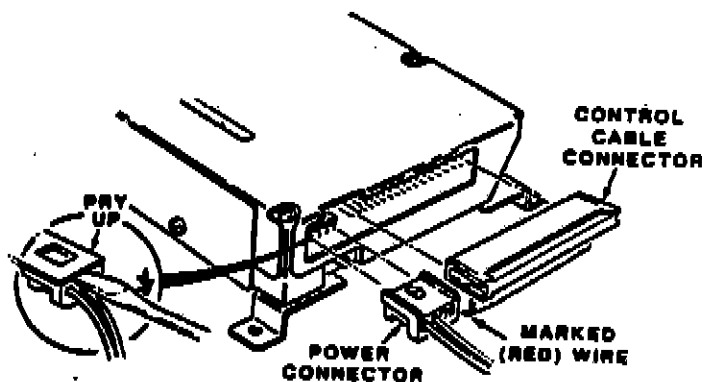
Disconnecting Floppy Drive B Power Cable
